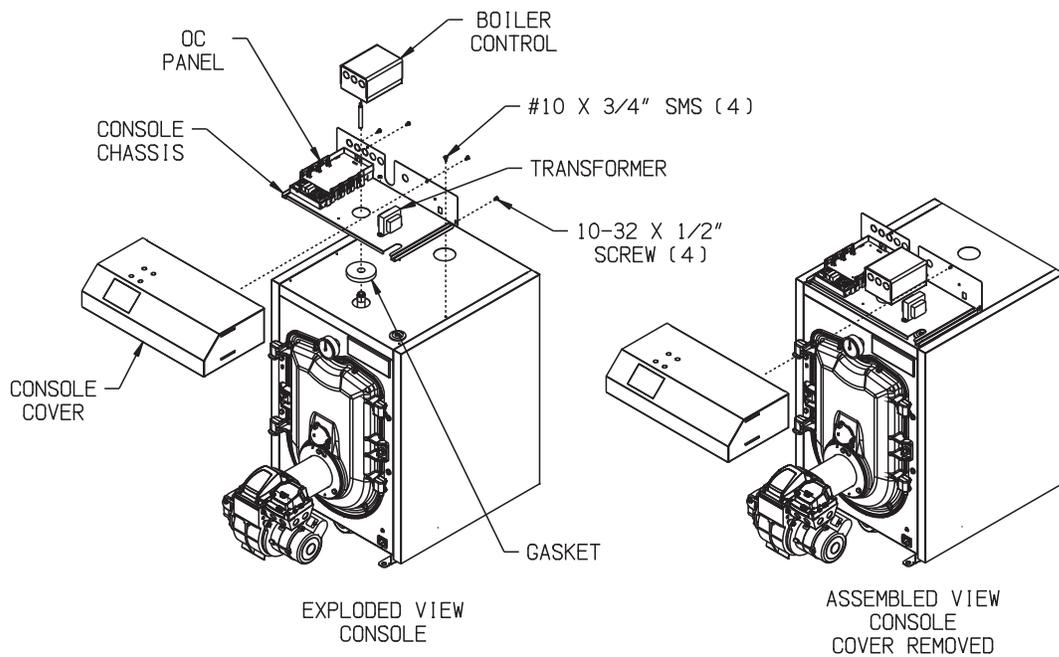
LOCATING THE OC PANEL ON FWZ BOILERS
